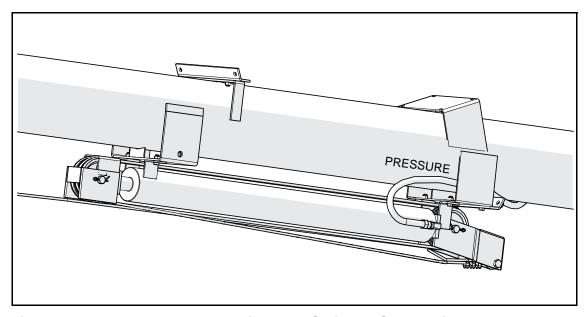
MKX100-63 Hydraulic Hose Cylinder Connection
